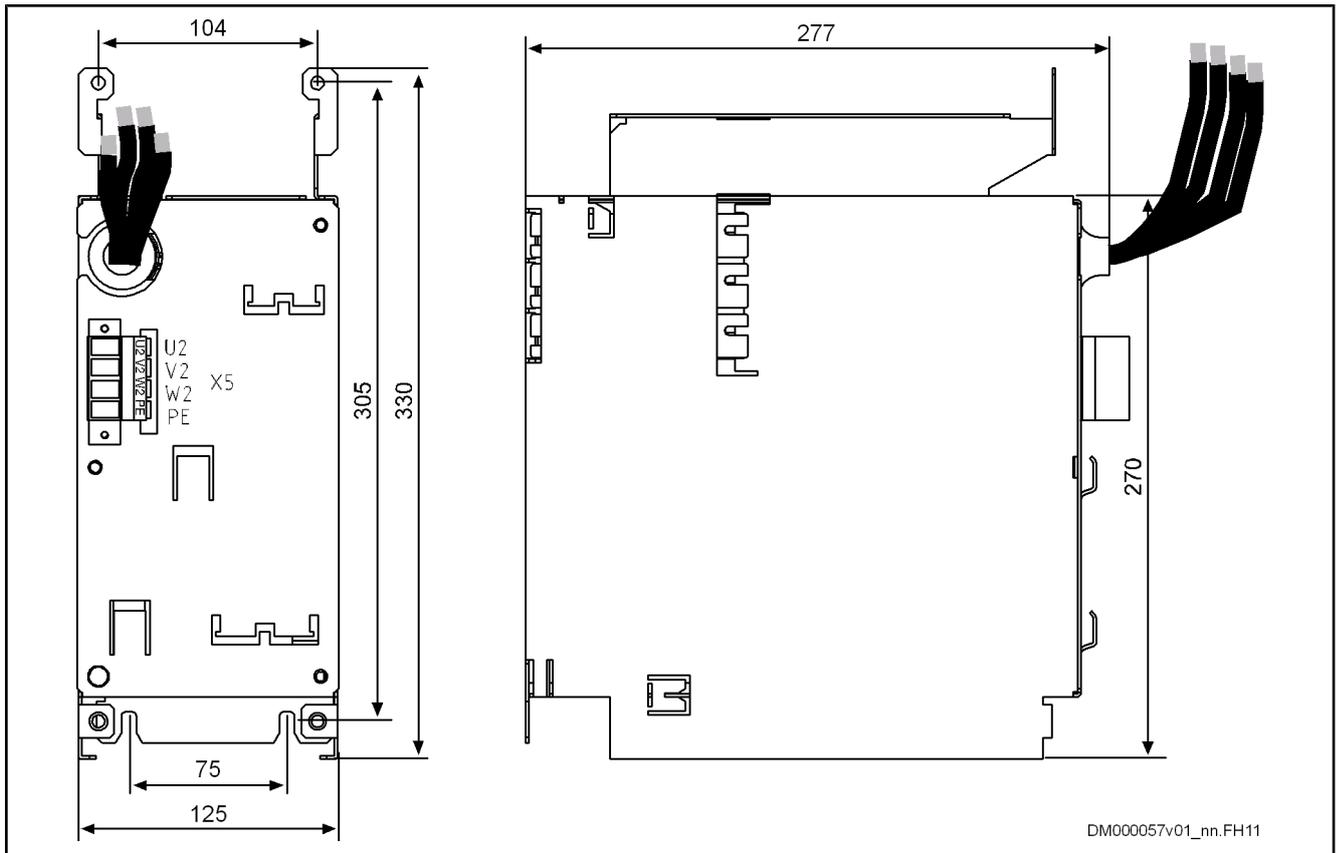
Dimensions motor filter HMF01.1A-N0K2-M0028-A-500-NNNN
